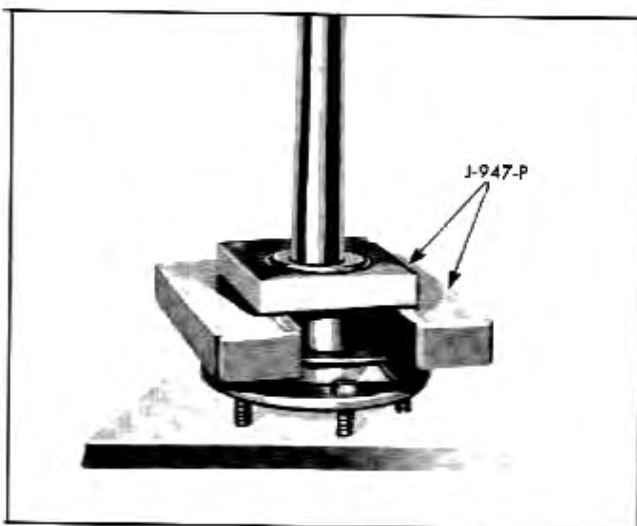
Bearing Replacer Tool J-947-P in Place for Pressing Bearing Off Shaft
